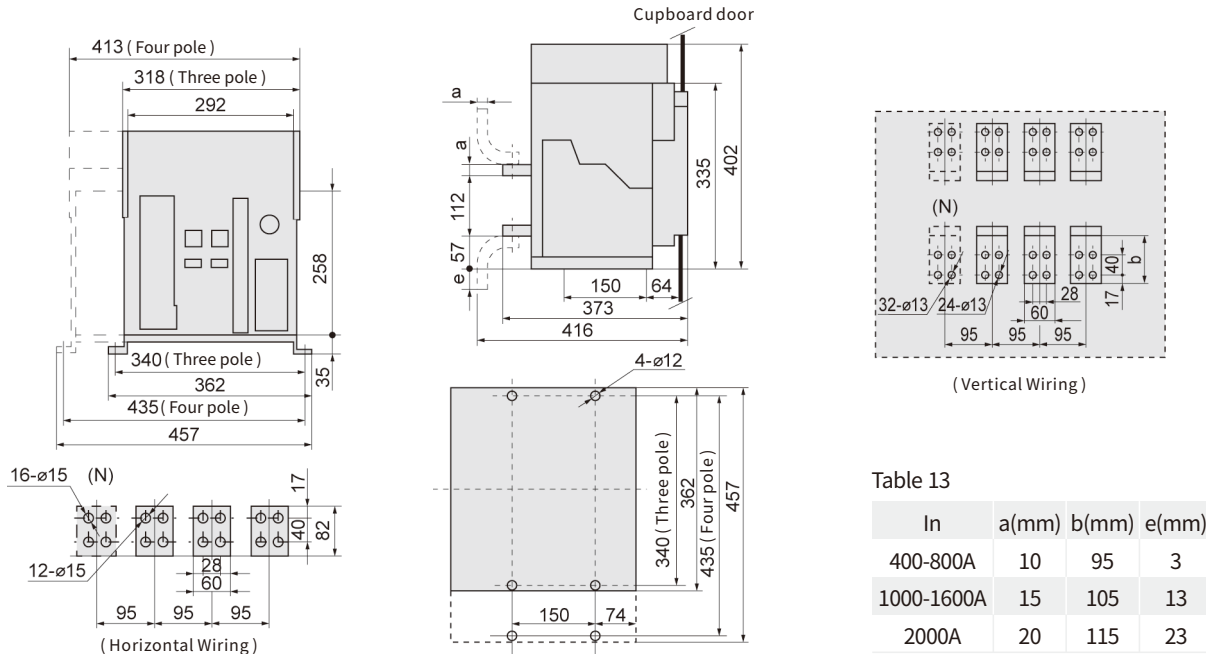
Outline and installation dimensions of fixed type circuit breaker (EKA1-2000, 2000/4)
